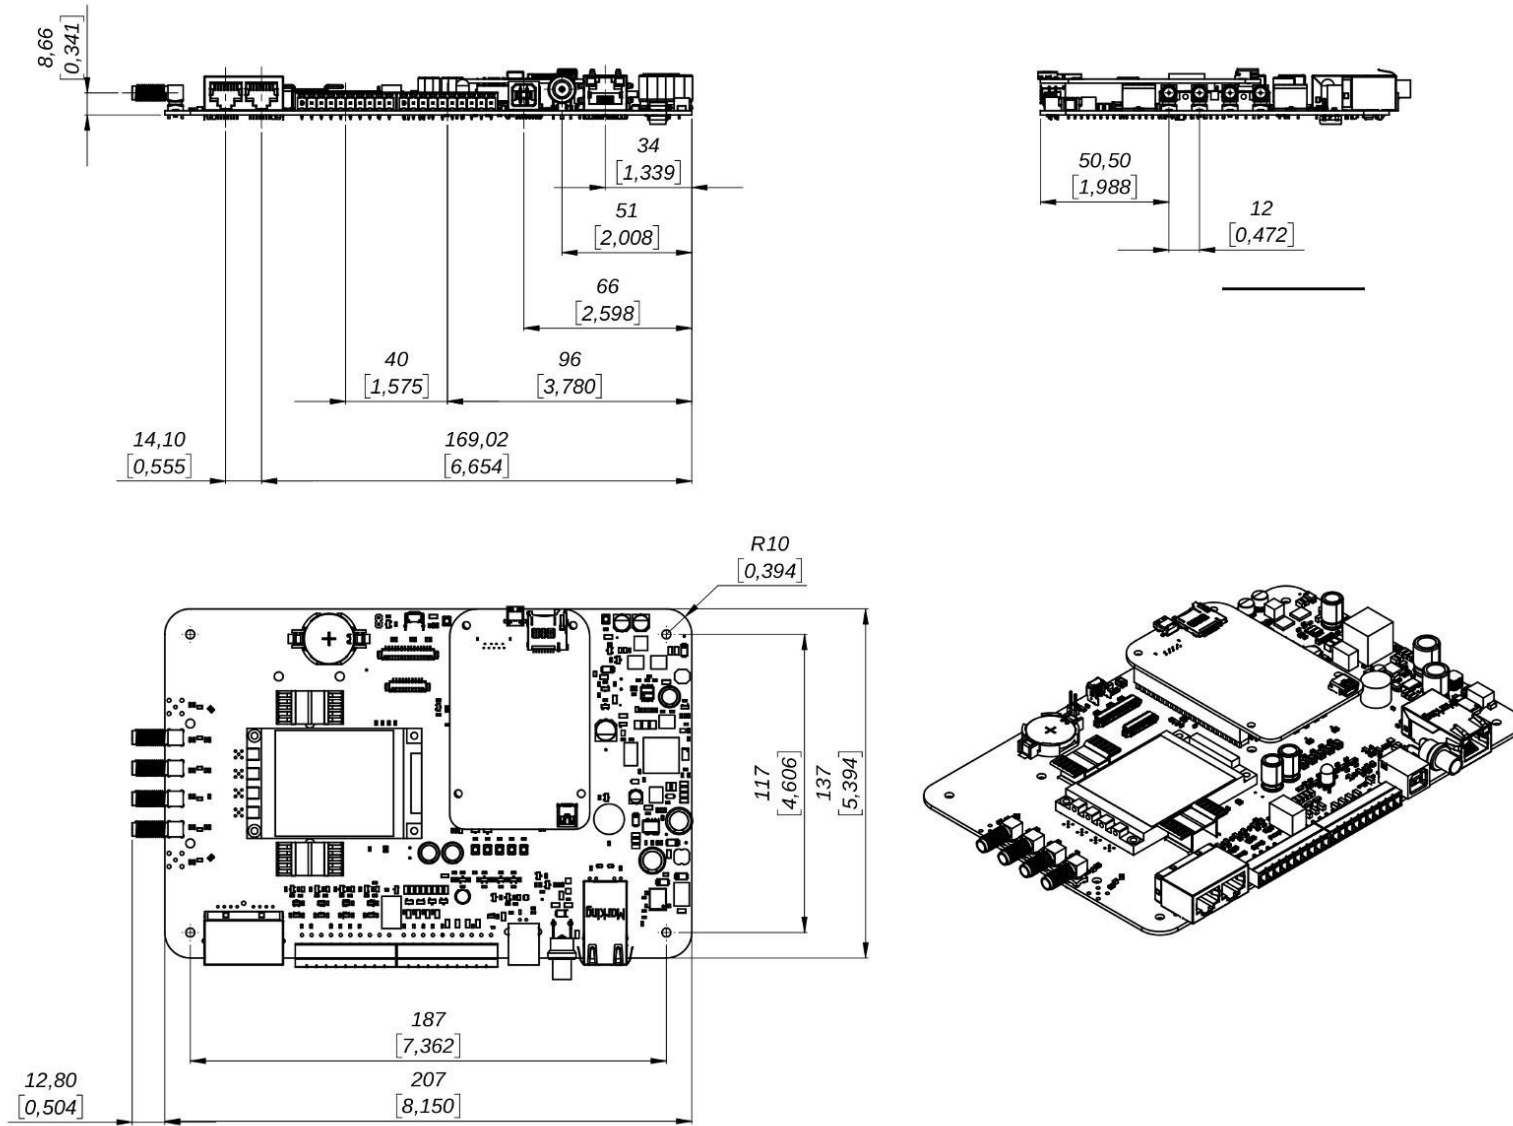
ADRD-m4-SMA-160 Dimensions mm [inches]
